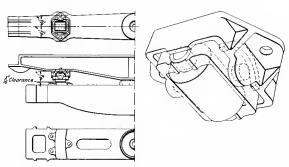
Miner Roller Side Bearing for Freight Car Trucks. W. H. Miner.
